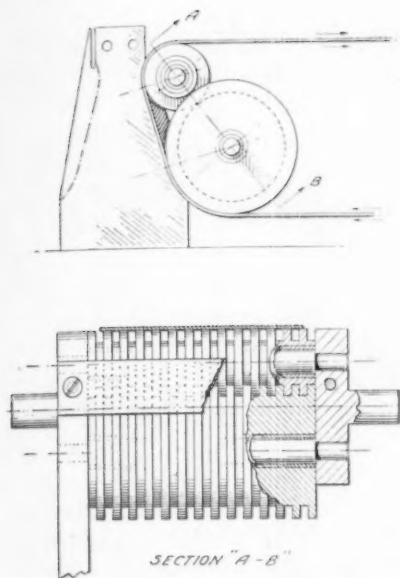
Details of the Compound Roller Assembly Used to Shape Fatigue Specimen.
